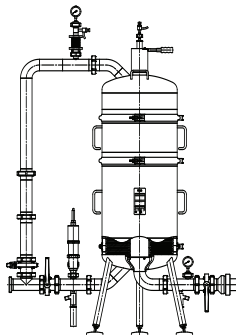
Outline drawing, 4 to 6-high SUPRApak L-SA housing
